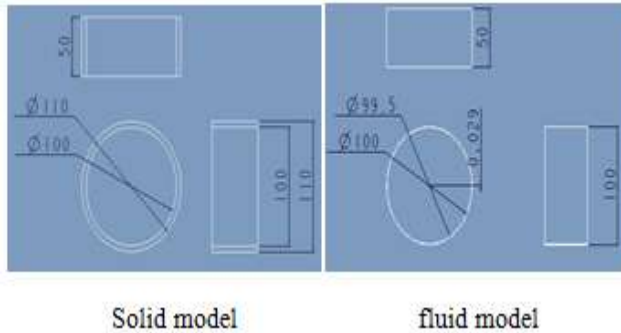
Case- 1.1 2D models of cylindrical journal bearing
